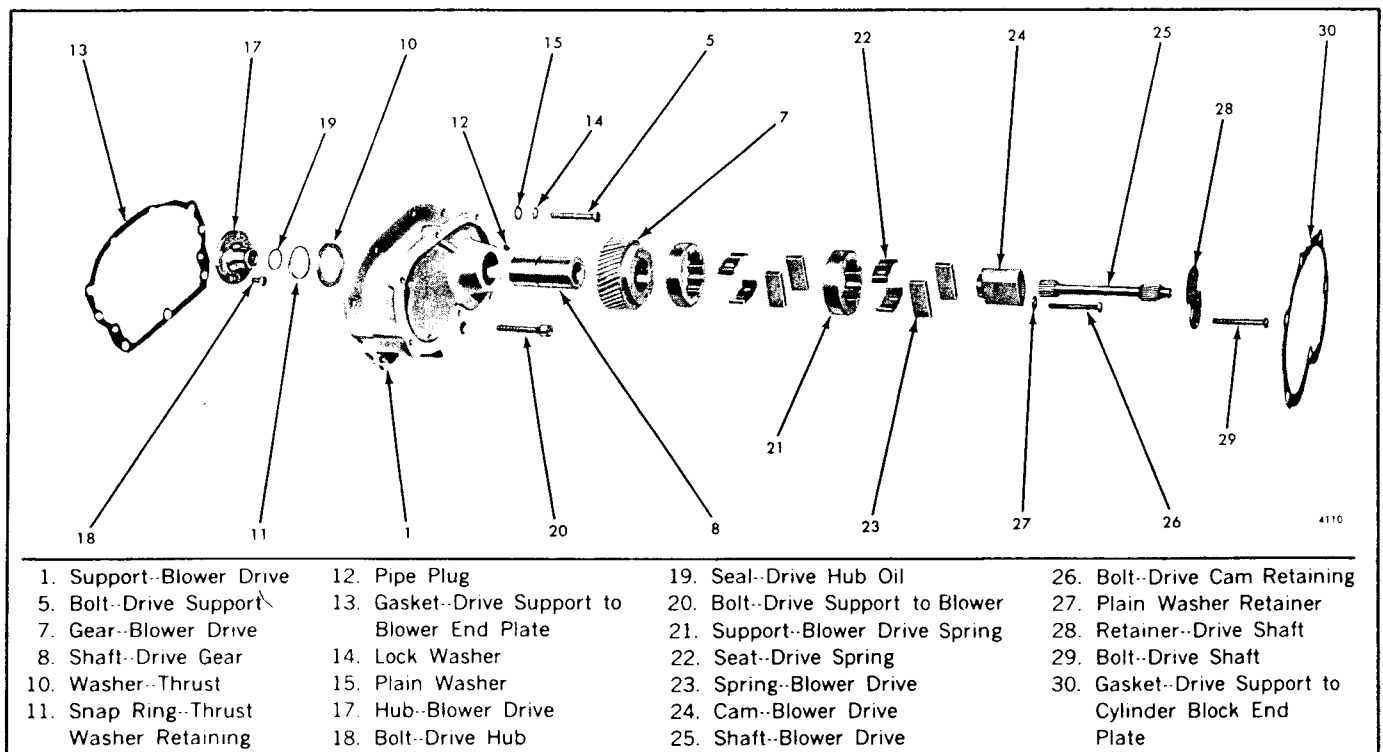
Blower Drive Support Details and Relative Location of Parts (8V-53 Engine)
